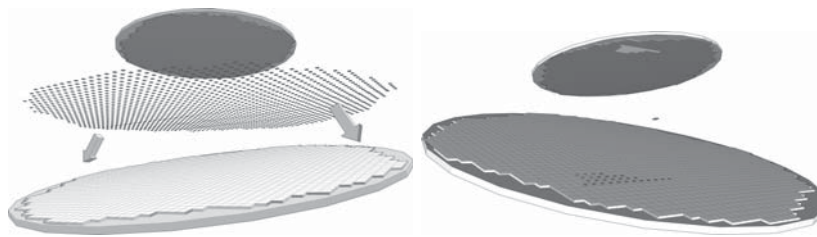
a) Parallel transfer of dies. b) Sequential pick-and-place assembly. Taken from [110]
